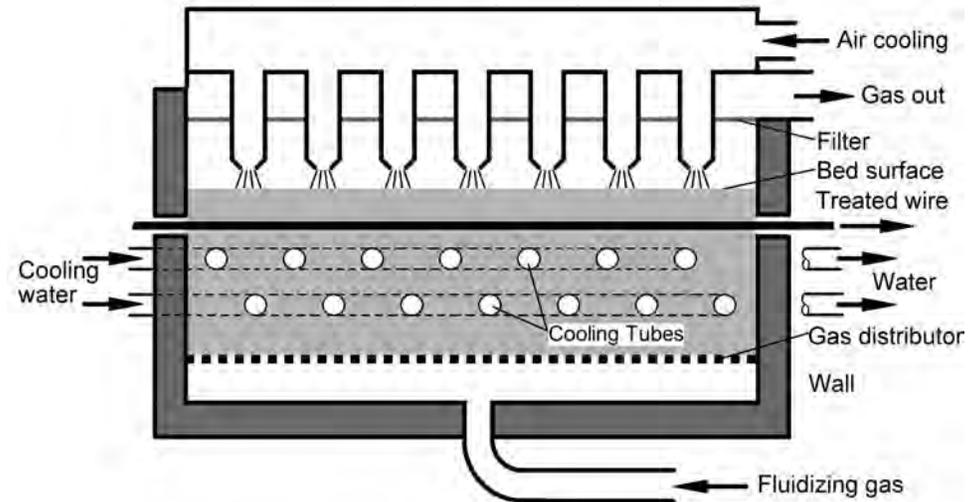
Schematic representation of continuous-cooling fluidized bed with immersed cooling tubes and surface air spray cooling
